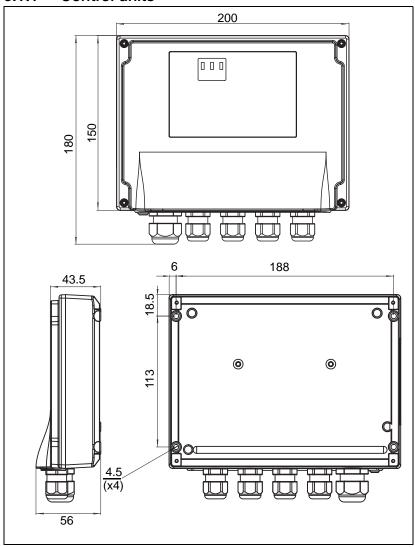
Dimensions, EMX-B15 control unit (mm).
